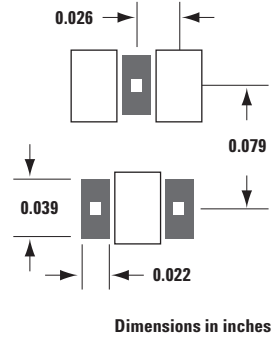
Recommended PCB Pad Layout for Avago's SC70 3L/SOT-323 Products.
